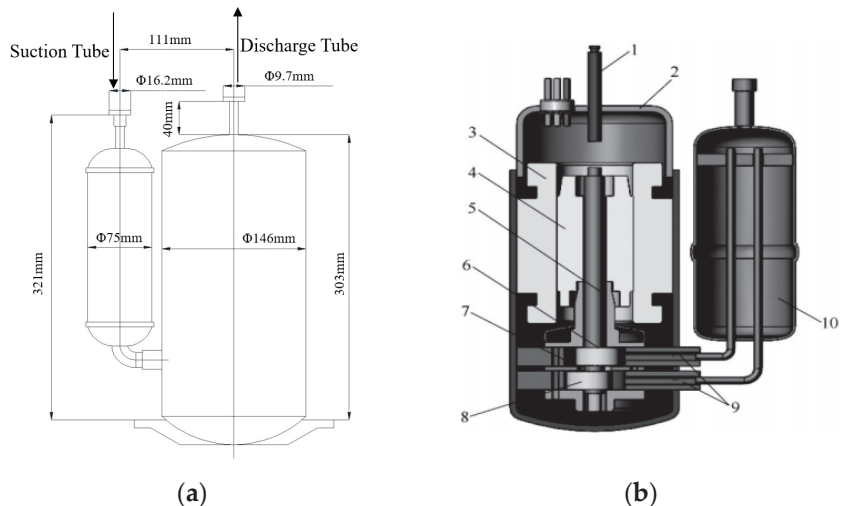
Schematic diagram of rotary booster structure. (a) Dimensions; (b) inner structure. 1-exhaust tube; 2-shell; 3-stator; 4-rotor; 5-crank axle; 6-cylinder 1; 7-baffle; 8-cylinder 2; 9-suction tube; 10-oil container.
